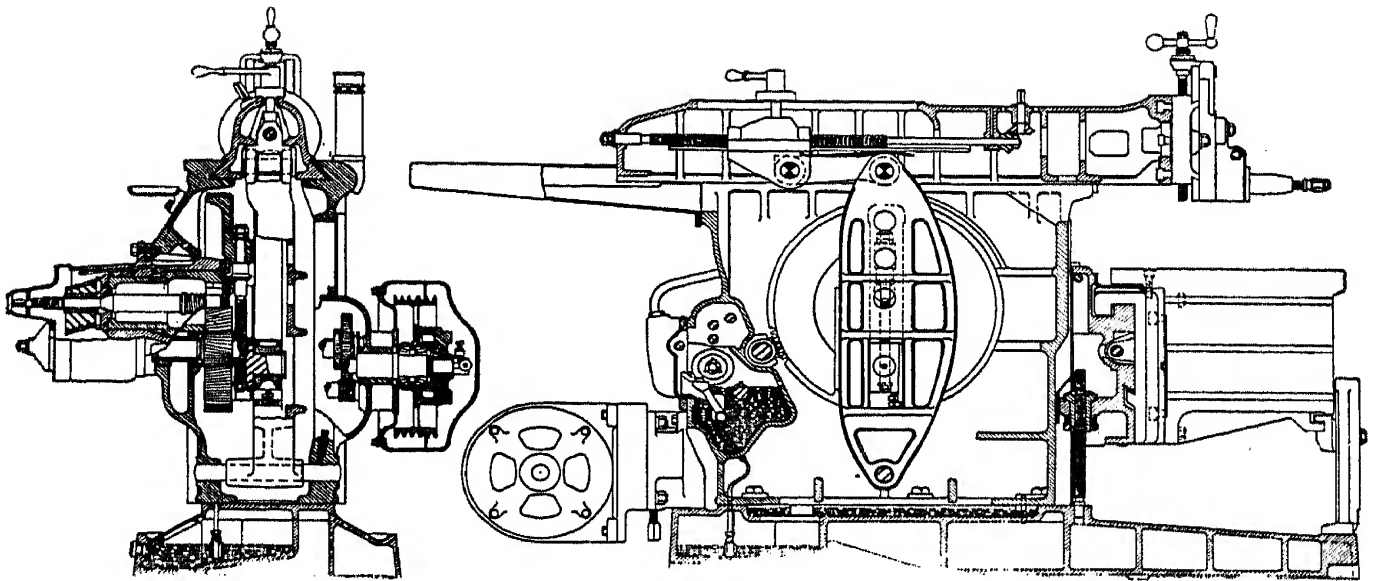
Cross-section views of a crank driven shaper. (Courtesy The Cincinnati Shaper Co.)
